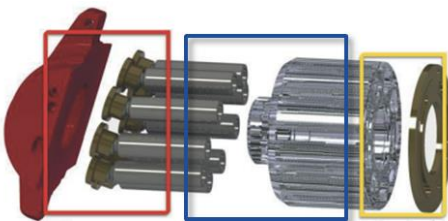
Interfaces of tribological contact within a fixed displacement axial piston pump [1]
